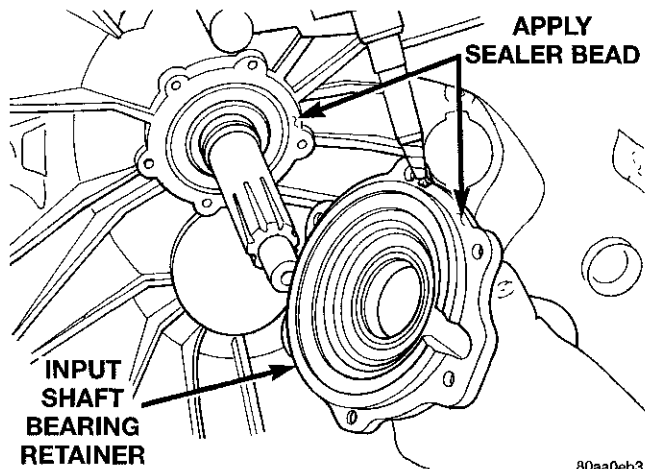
Applying Sealer To Bearing Retainer And Housing
